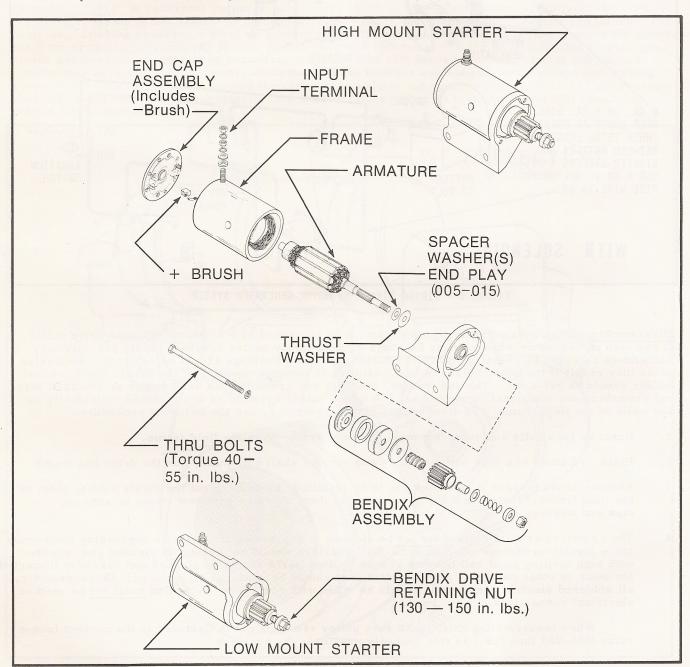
COMPACT STARTER (BENDIX TYPE), EXPLODED VIEW
